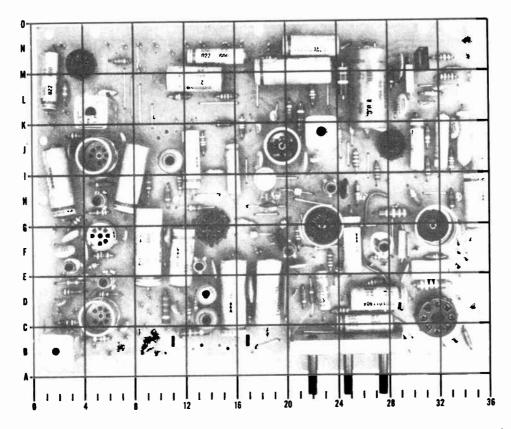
Top view of printed circuit board. Guide to location of resistors, capacitors, coils, and transformers when used with the chart below.
